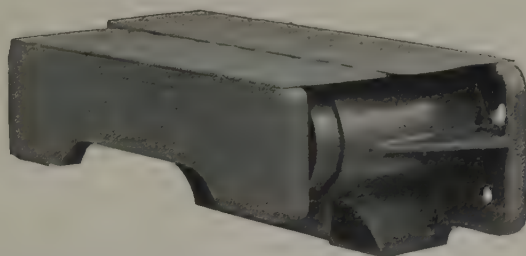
Gould Spring Buffer for Express Refrigerator and Freight Cars. Gould Coupler Company.
